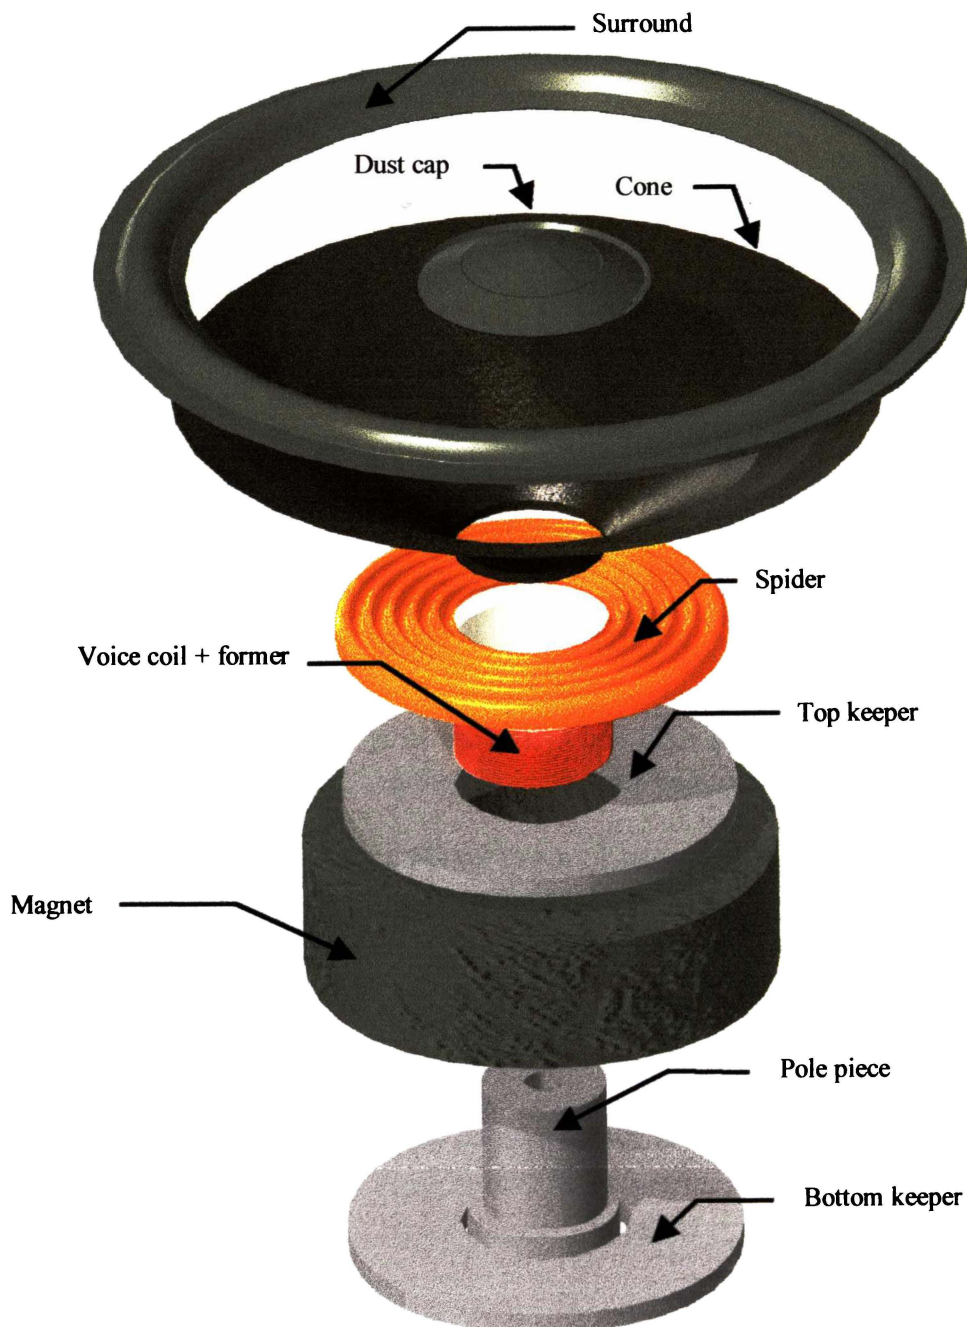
Exploded view of the electrodynamic loudspeaker
